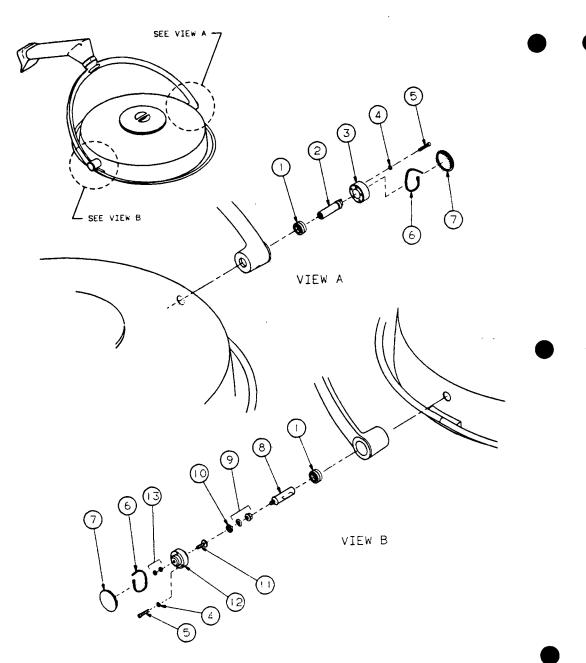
LIGHTHEAD PIVOT ASSEMBLIES.
